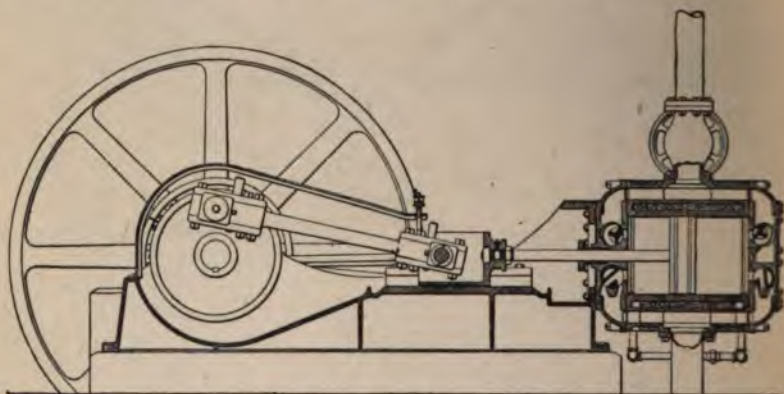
Section of Single Cylinder Engine, with Corliss Valves, made by the Atlas Co. The form of the Entry and Exhaust Valves are clearly shown.
